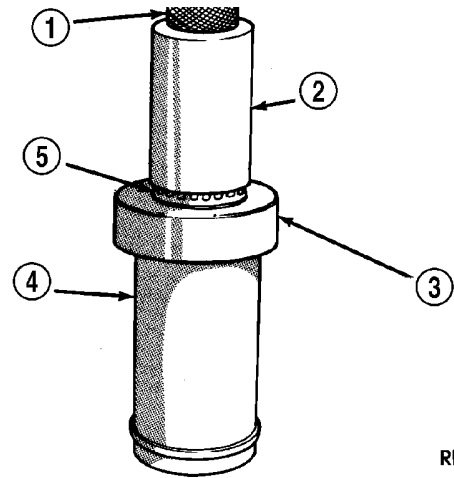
Install Rear Planetary Annulus Gear Bearing Cone
